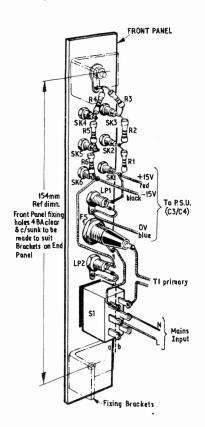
Wiring details for rear of p.s.u. control strip
